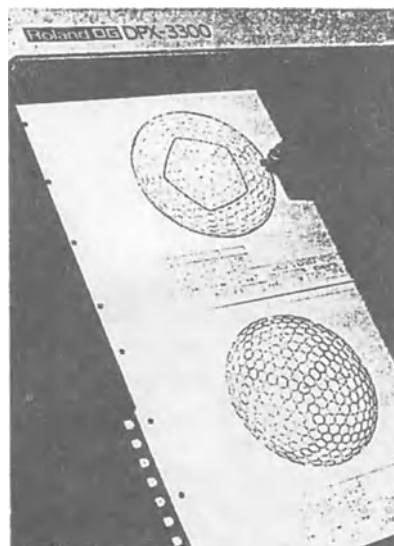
CAD is used to calculate and specify of the optimum dimple to be used and to direct machine tool control in the mold construction cavity.
